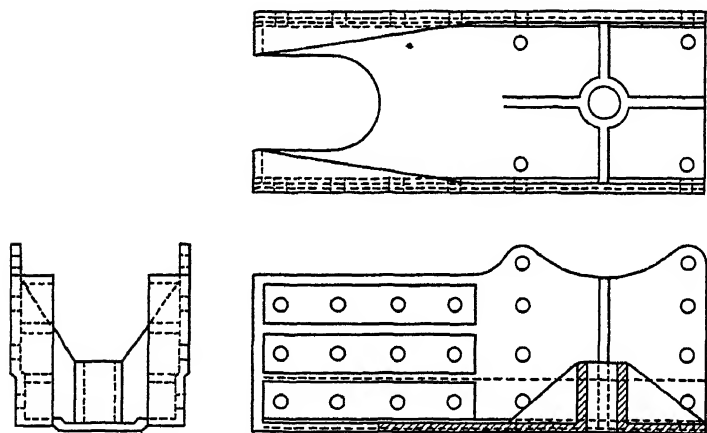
REAR DRAFT LUG AND BOLSTER CENTER CASTING
